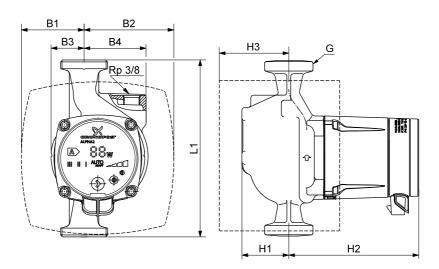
Dimensional sketches, ALPHA2 25-40 A, 25-60 A
